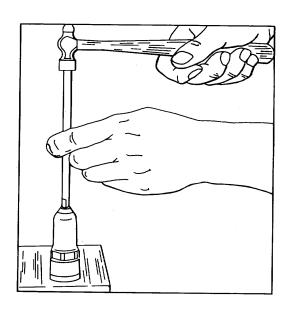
Removing Spray Tip from Injector Nut using Tool J 1291-02
